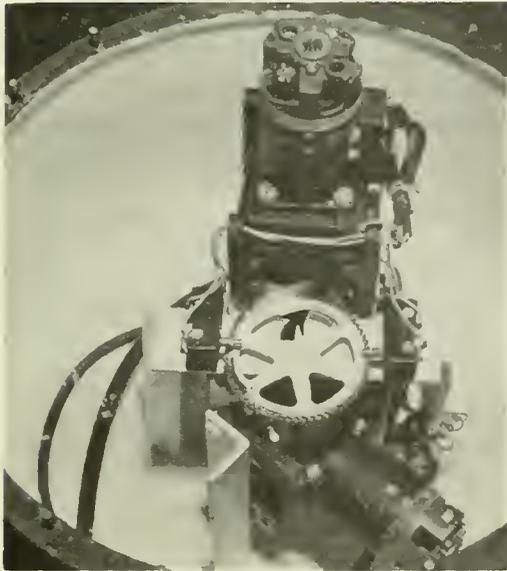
View of drive motor assemblies. Arrow indicates vertical limit switch cam.
